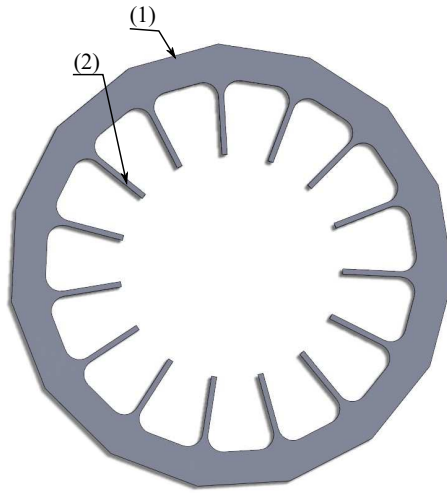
Illustration of the resulted flat surface for mounting the power converter modules: (1) Flat surface, (2) Stator heat extraction fins.
